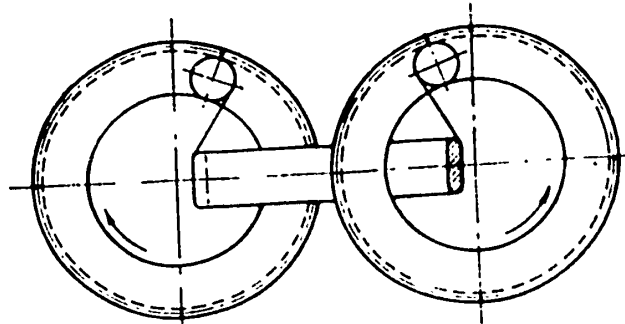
Schematic Sketch of Winding Two Sections of One Core on the Machine Developed by V. I. Grishin.
